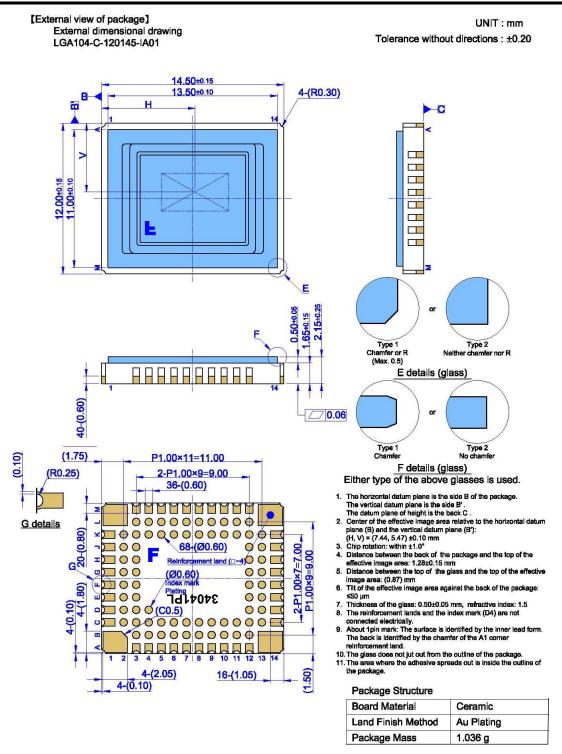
Package Dimensions (LGA104-C-120145-IA01)
